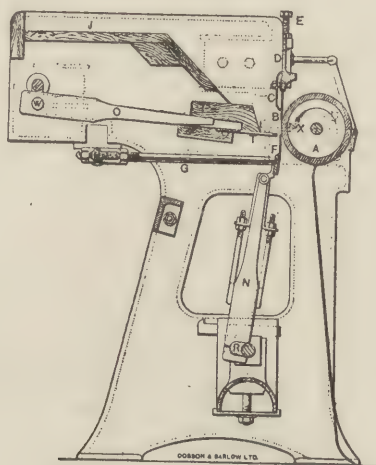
A.—Section of Single Macarthy Cotton Gin.
